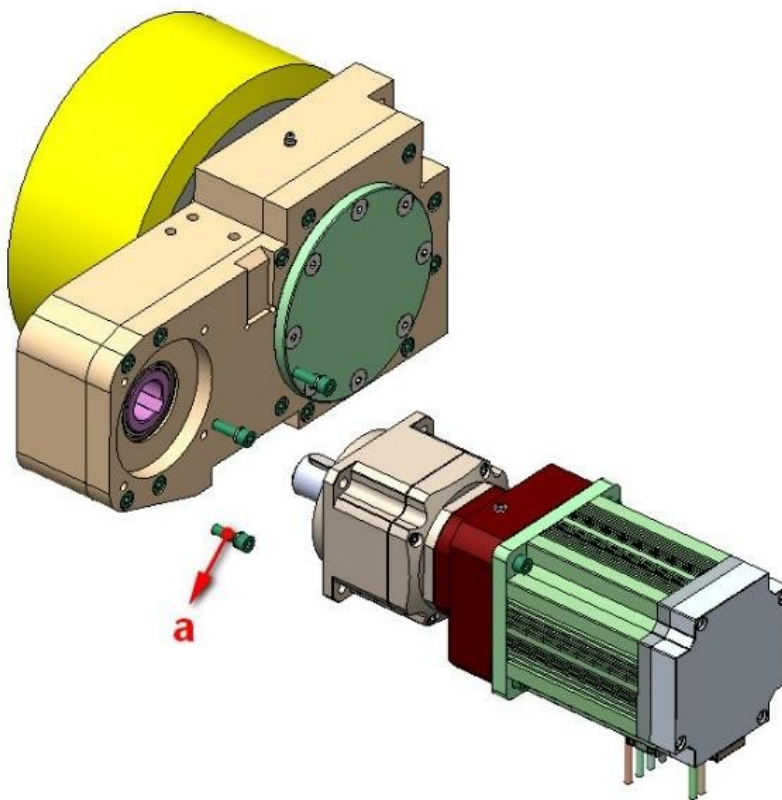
Planetary gearbox removal arrangement from the supplied manual.
